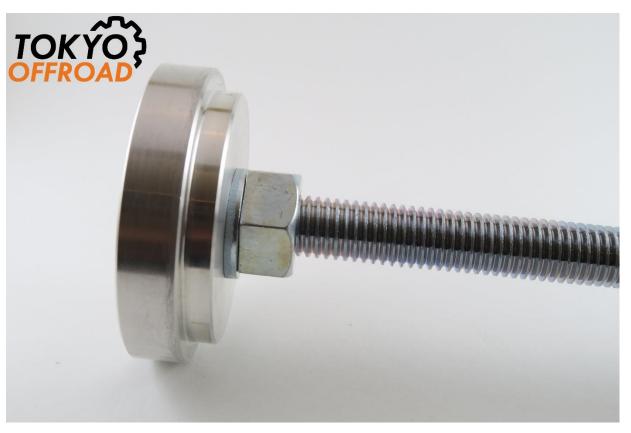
Assembled Wheel Bearing Press Tool base plate and rod
